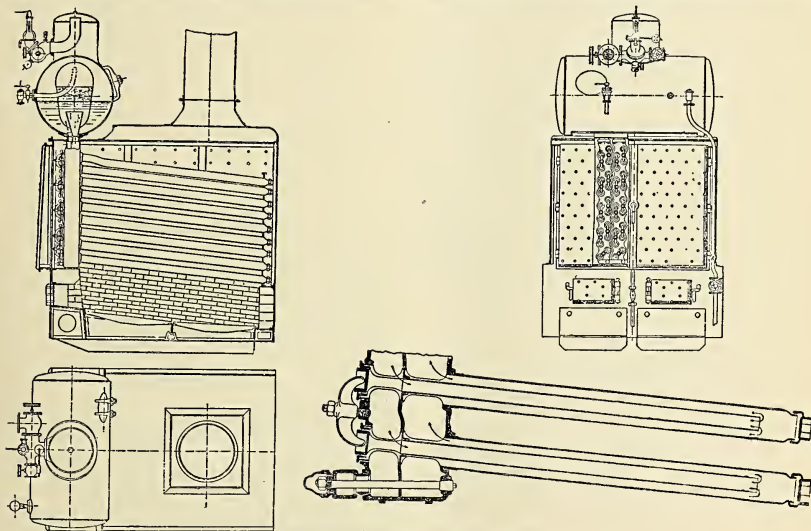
NICLAUSSE WATER TUBE BOILER.
